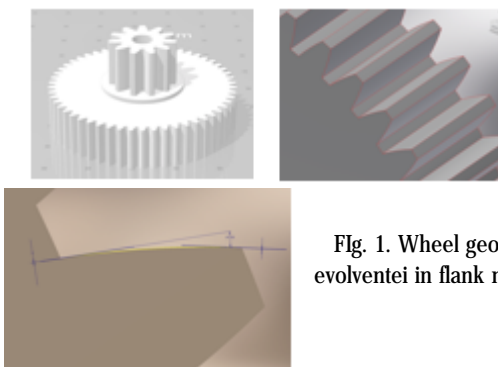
Wheel geometry and evolventei in flank made in CAD
